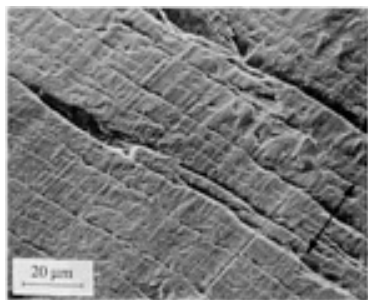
Scanning electron micrograph showing fatigue fracture in a tool steel (AISI D1) punch used to cut 1 mm (0.04 in.) stainless steel sheets
